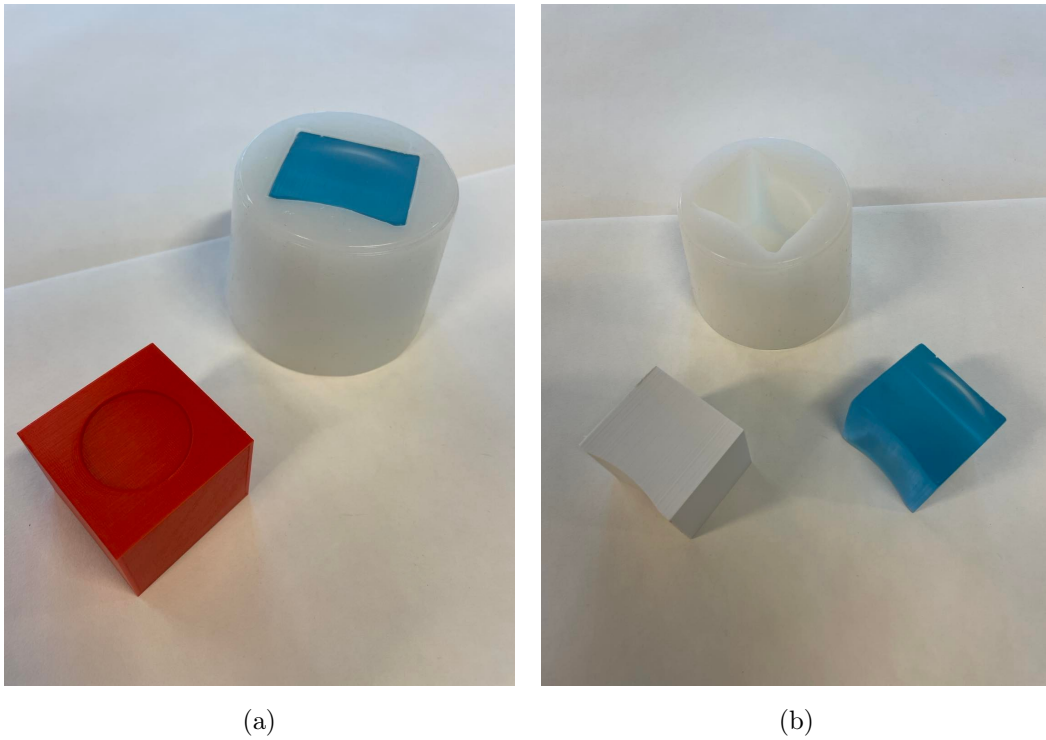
3D-printed wedge with silicone mould and cast epoxy wedge for a) PE pipe sample and b) GFRP pipe sample
